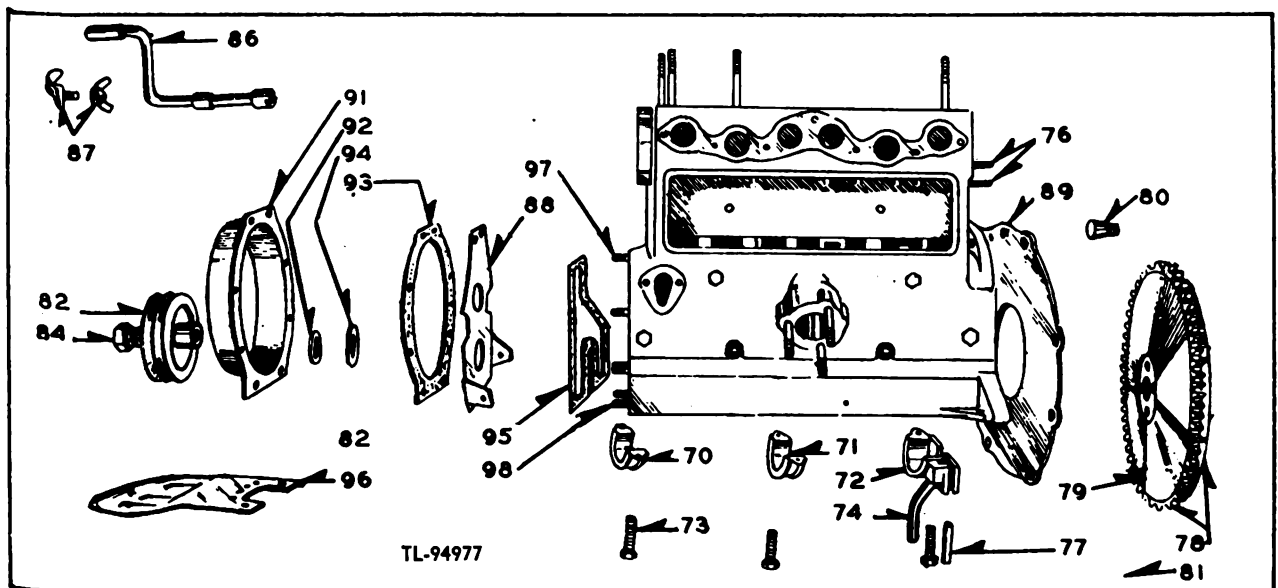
Timing chain cover, flywheel, bearings and crank group.
